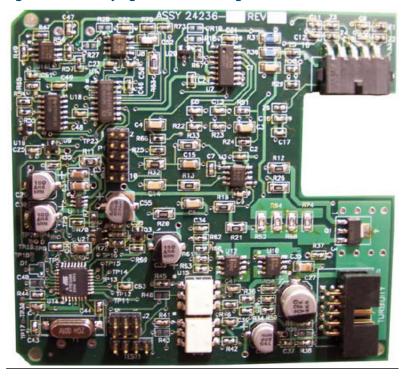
Turbidity Signal Board with Plug-in Sensor Connection
